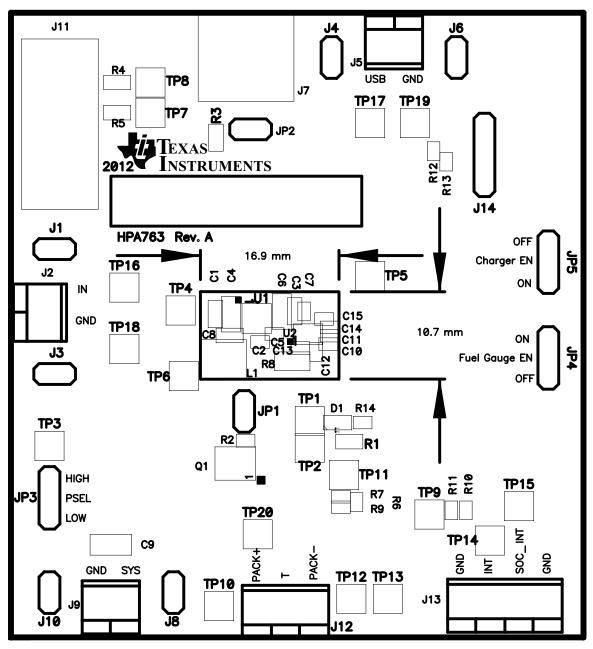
bq27530EVM-001 Layout – Layer 1 Silk Screen
